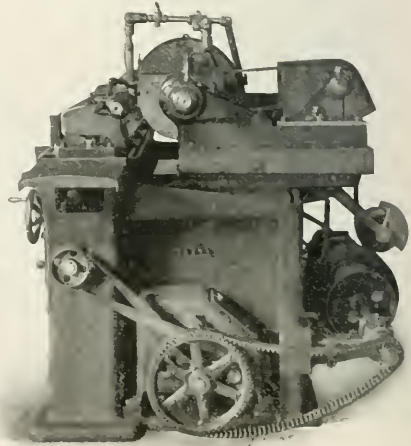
Right-hand End of 8- by 18 inch Grinder, showing Table Drive, Gear-box and Main Drive
